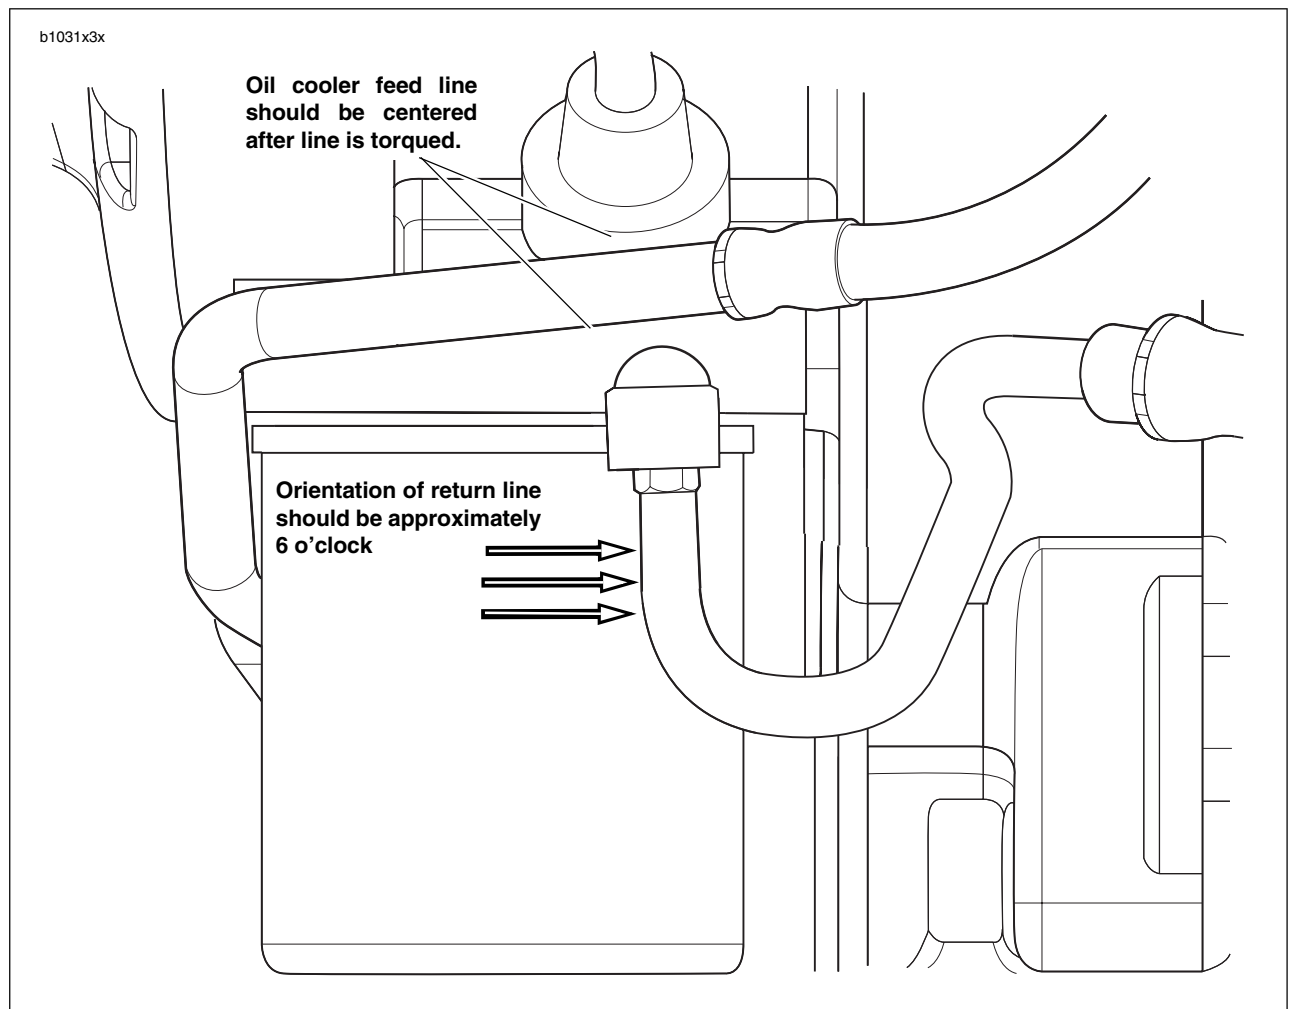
Oil Cooler Feed and Return Oil Lines Location and Orientation
